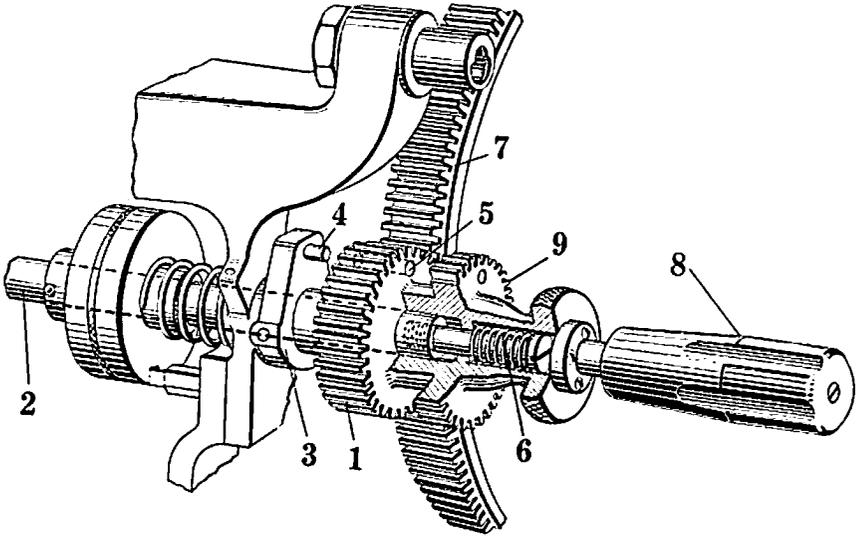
Showing the Relationship Between the Mold Disk Driving Pinion and the Mold Driving Pinion Shaft. The shaft 2, as shown in Fig. 46, is turned by a series of pinions which are set in motion by two segments on the mold turning cam. Pinned to the front end of shaft 2 (this figure) is a flange 3 with a pin 4 in its front edge. The pin is normally seated in a hole 5 in the mold disk driving pinion 1 through action of spring 6, which continually urges the pinion towards the flange 3.
